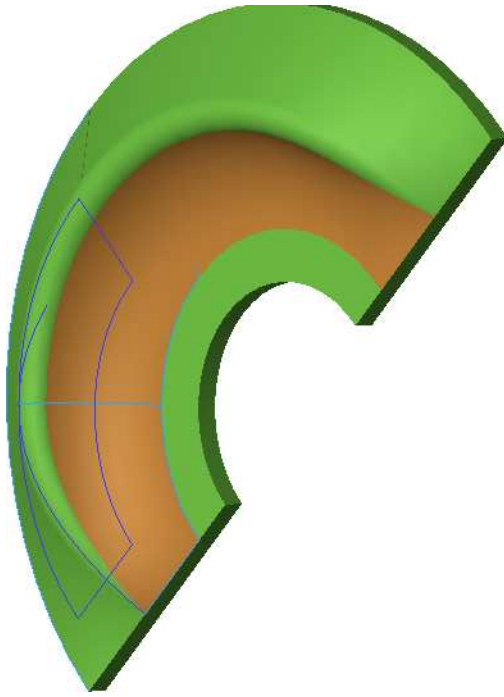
DETAIL OF GENERIC RIDGE USED FOR CONSTRUCTING TRACK - SEE TABLE FOR SPECIFIC DIMENSIONS
